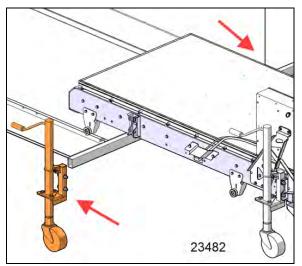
JACKS REMOVAL ON REAR SIDE Install the fasteners on the dismounted jacks.
